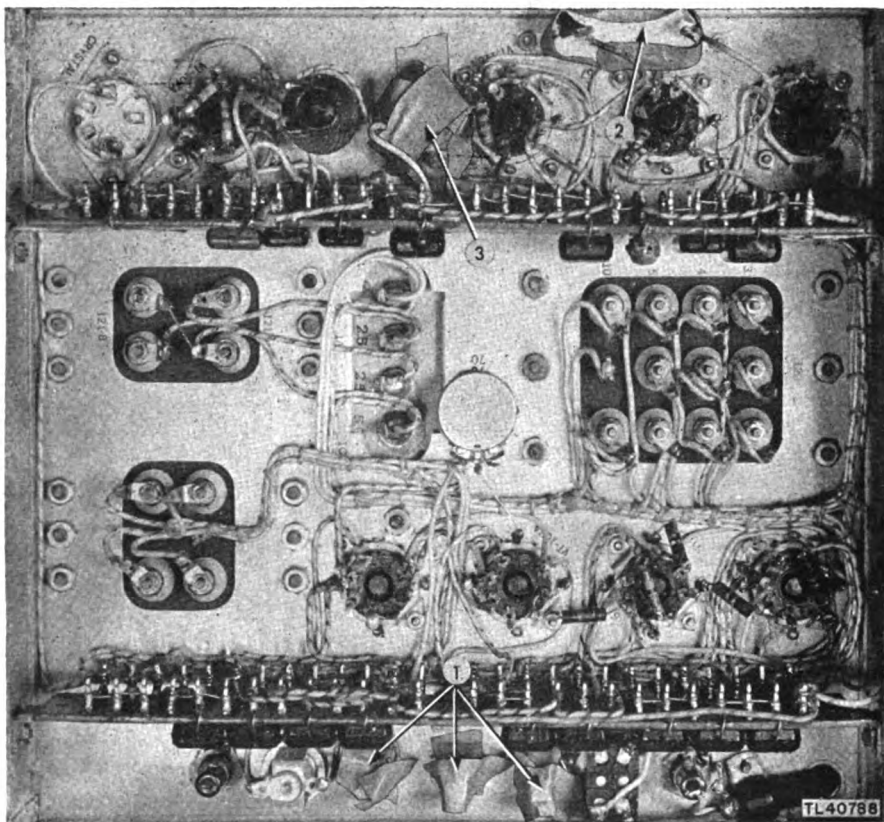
Range Calibrator I-223-A—bottom view showing masked parts.
